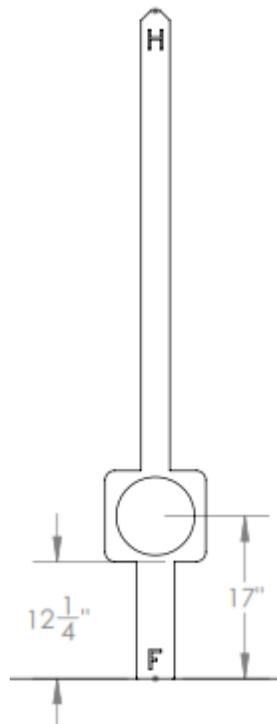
Hole Cut-out Flat Bottom Bin- INLET HOLE TEMPLATE
